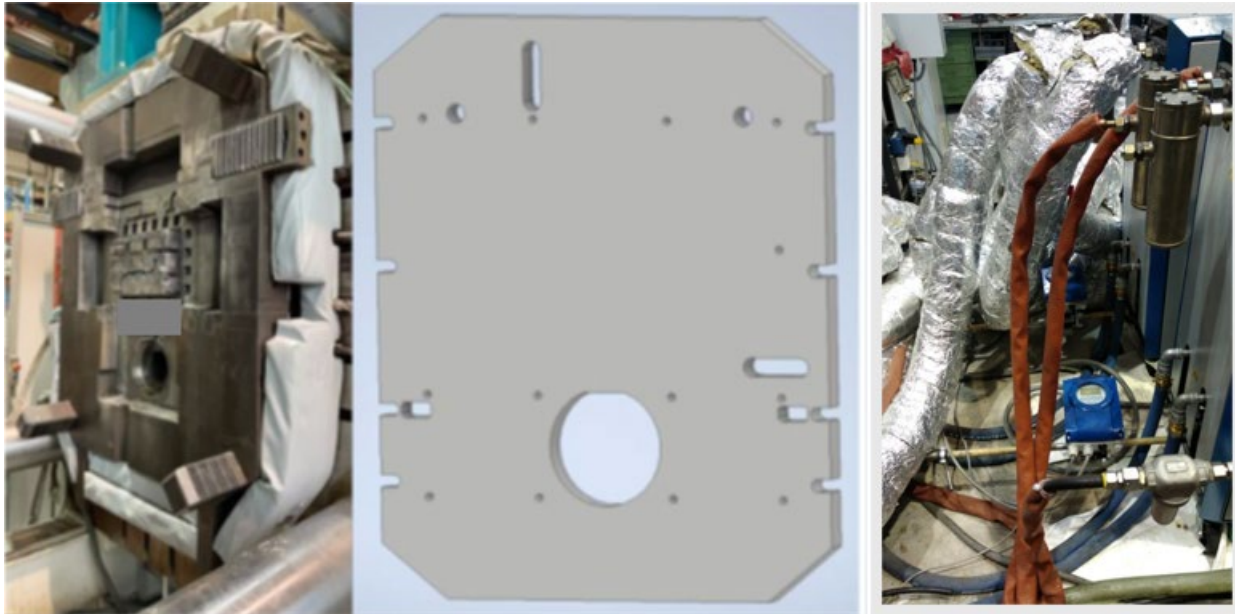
Left-hand side: Casting die of an inverter housing of a real series car with a flexible, cost-effective and maintainable insulation applied. Center: 50 mm thick insulation plate that applied between die and casting machine. Right-hand side: Standard insulation (red tubes) vs. adequate insulation (thick tubes mit aluminum-foil covering mineral wool):
